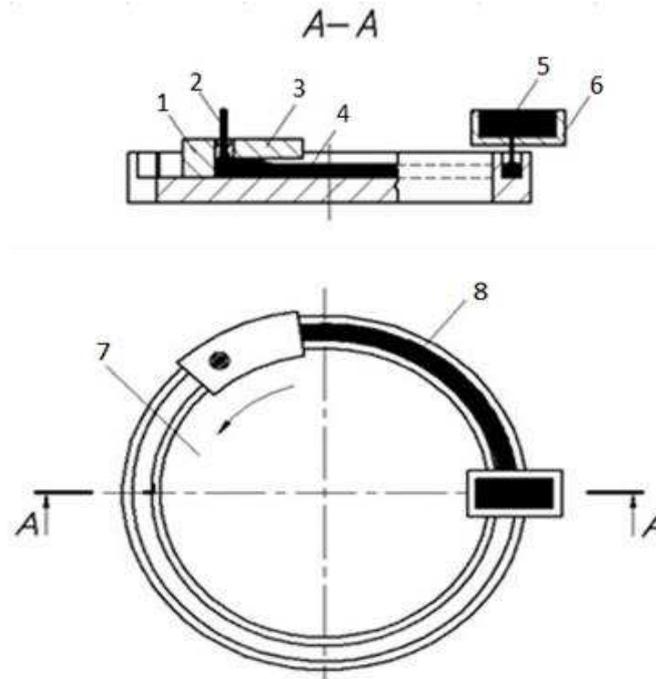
Installation scheme of continuous casting and extrusion with horizontal carousel mold:
